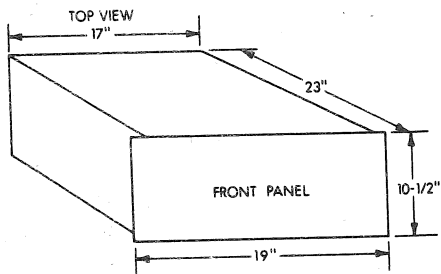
10-1/2" PDP-11/05 & 11/10 Assembly Unit
